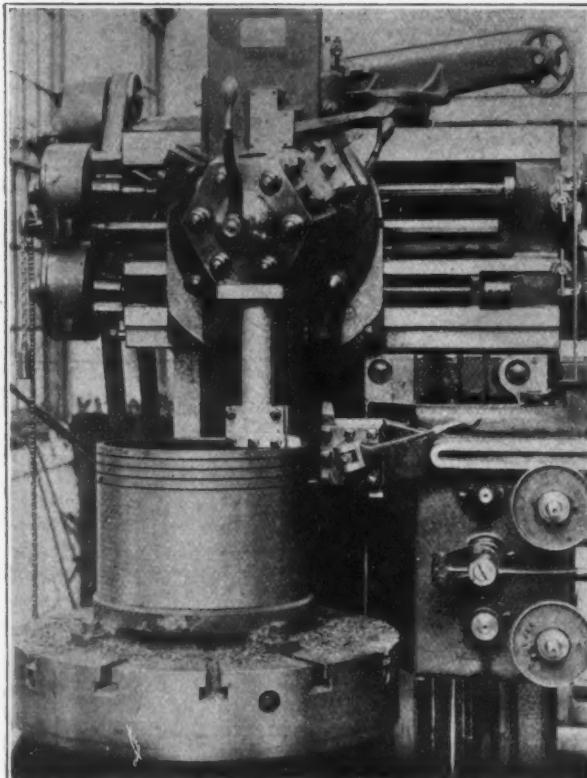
The Parts as Engaged in Turning Piston Rings.
